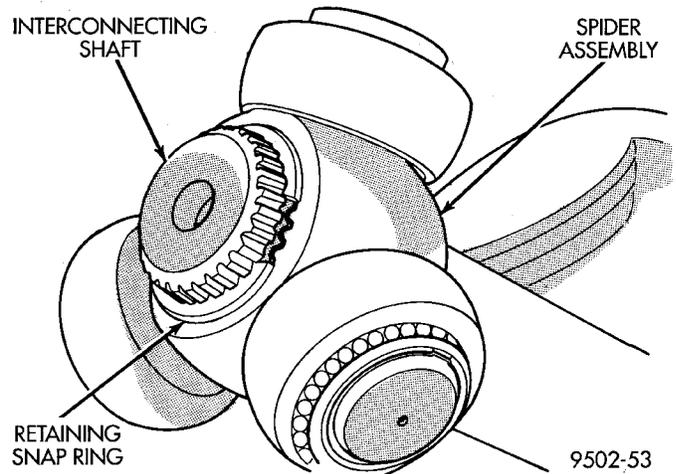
Spider Assembly Retaining Snap Ring Installed
